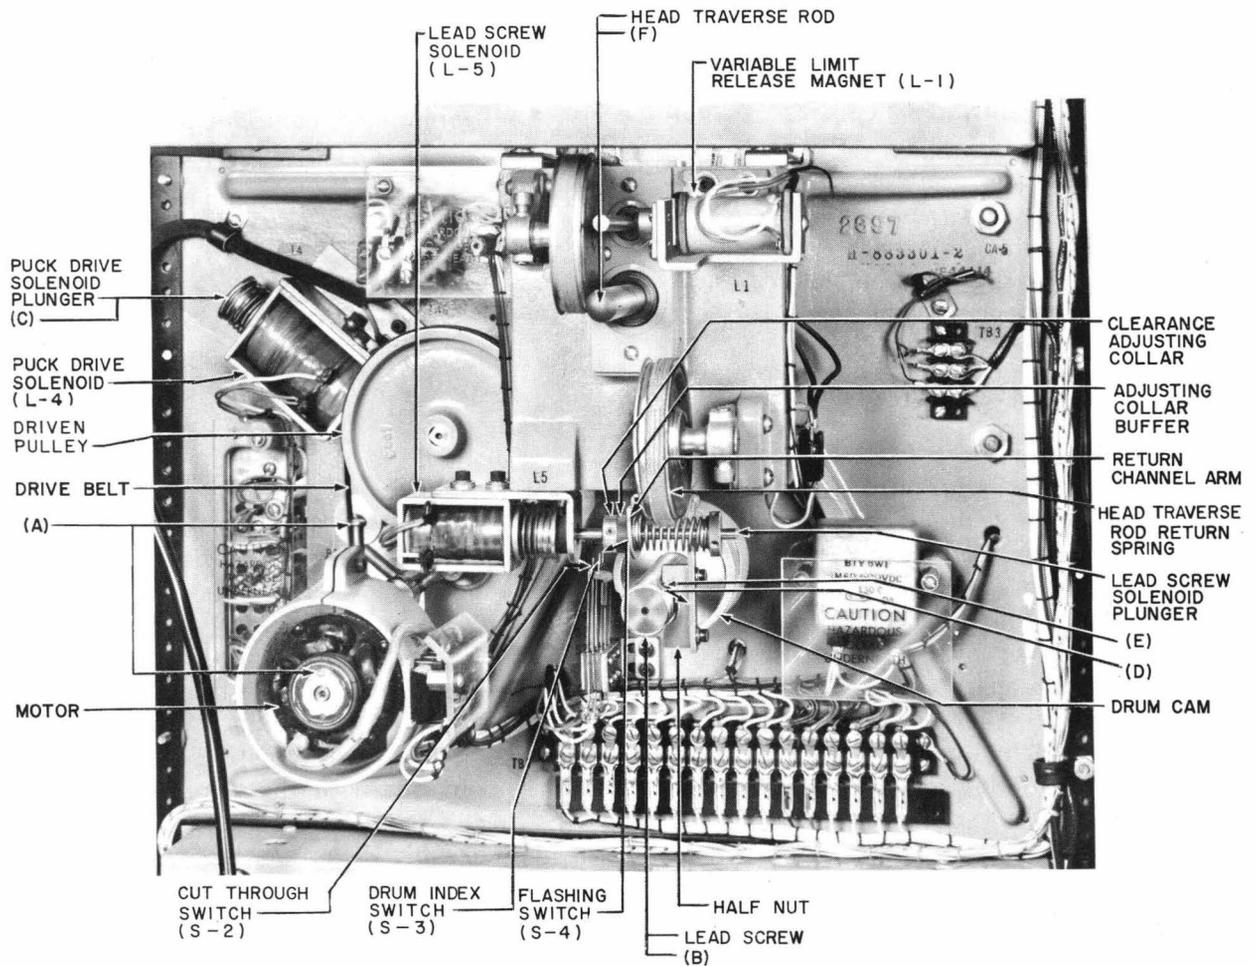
Recorder-Reproducer Mechanism — Rear View (Cover Removed)
